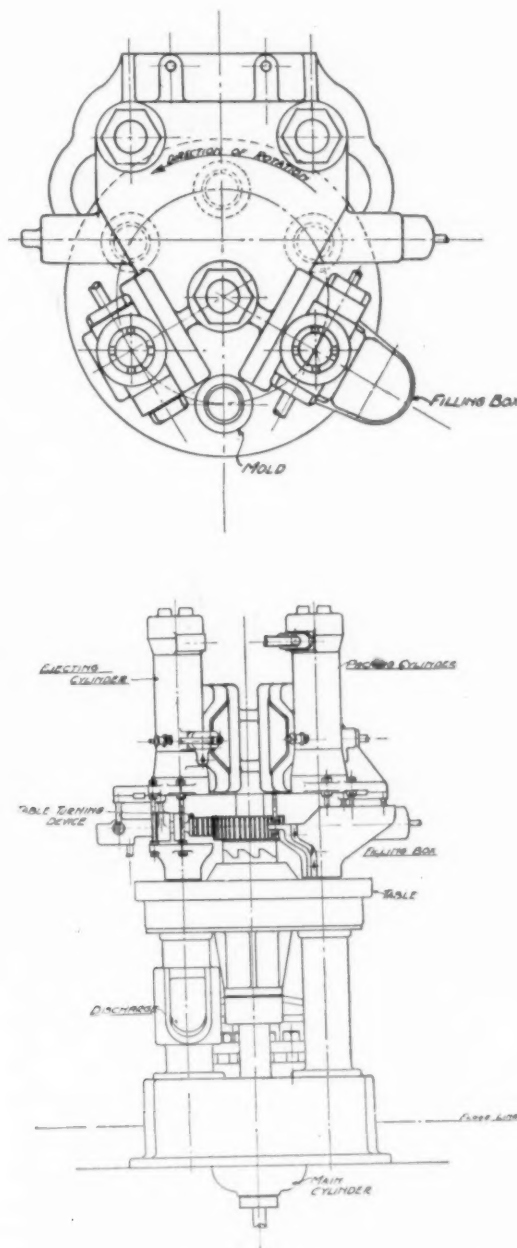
PLAN AND ELEVATION OF RONAY PRESS.
